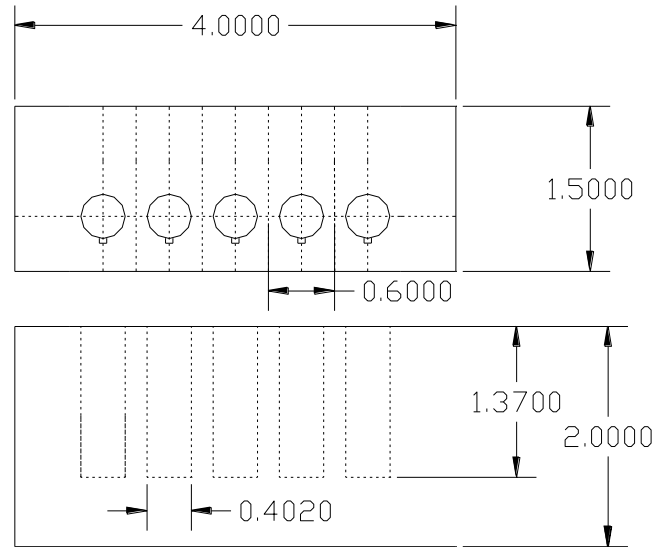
CAD drawing of the plastic LED switch box and enclosure (units in inches)
